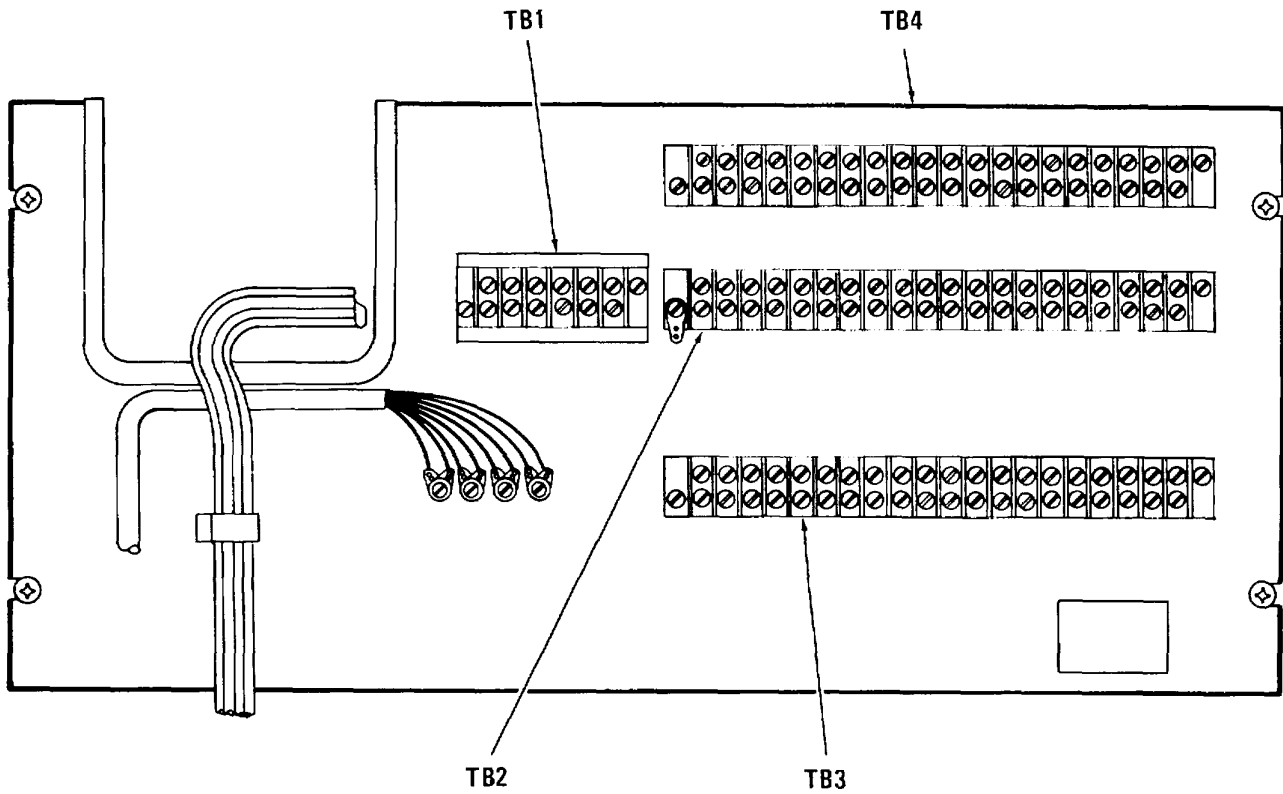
Electrical Equipment Rack Disassembly (Sheet 3 of 3)
